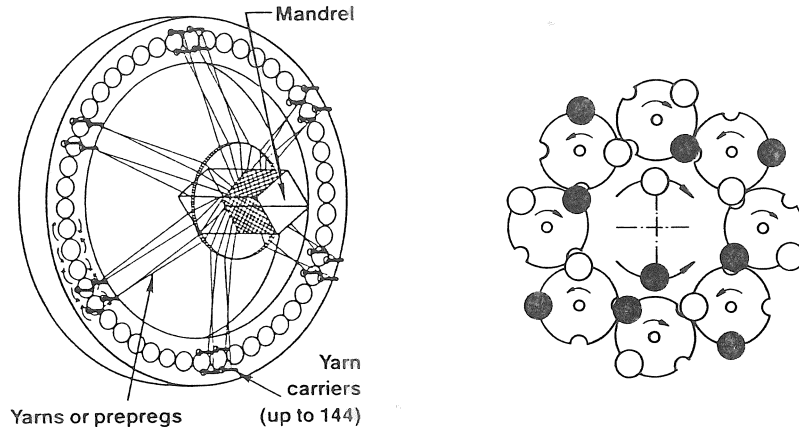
Braiding machine [26] Motion of yarn carriers [63]
